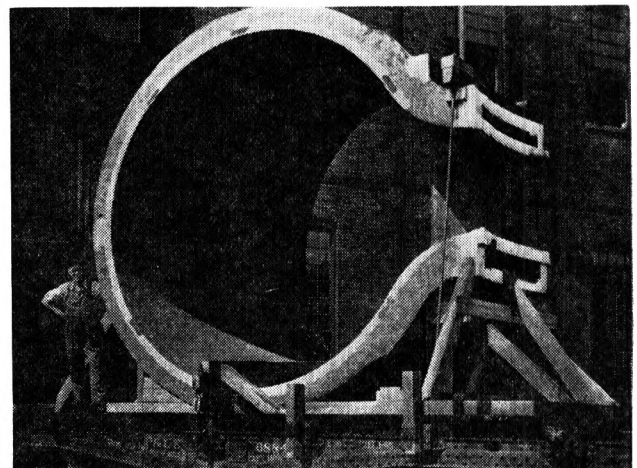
CASTING FOR CASING SECTION NO. 7; WEIGHT 38,000 LB
